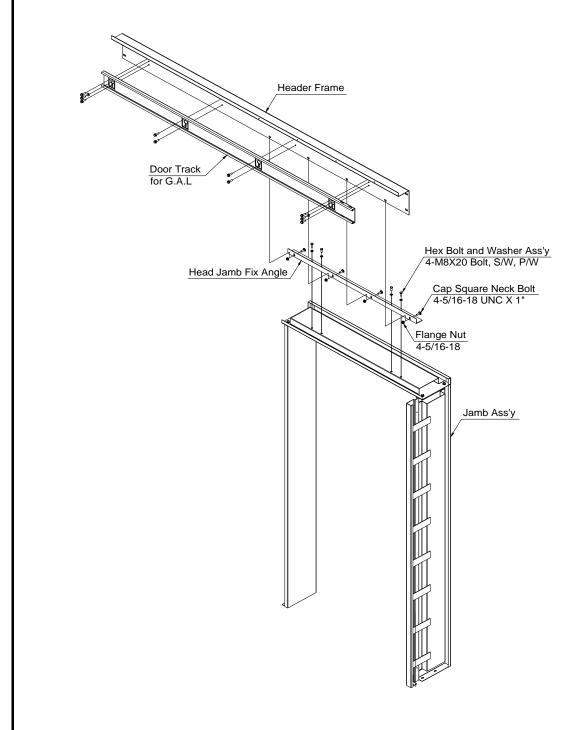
HEADER FRAME AND JAMB FIXING (SS)
